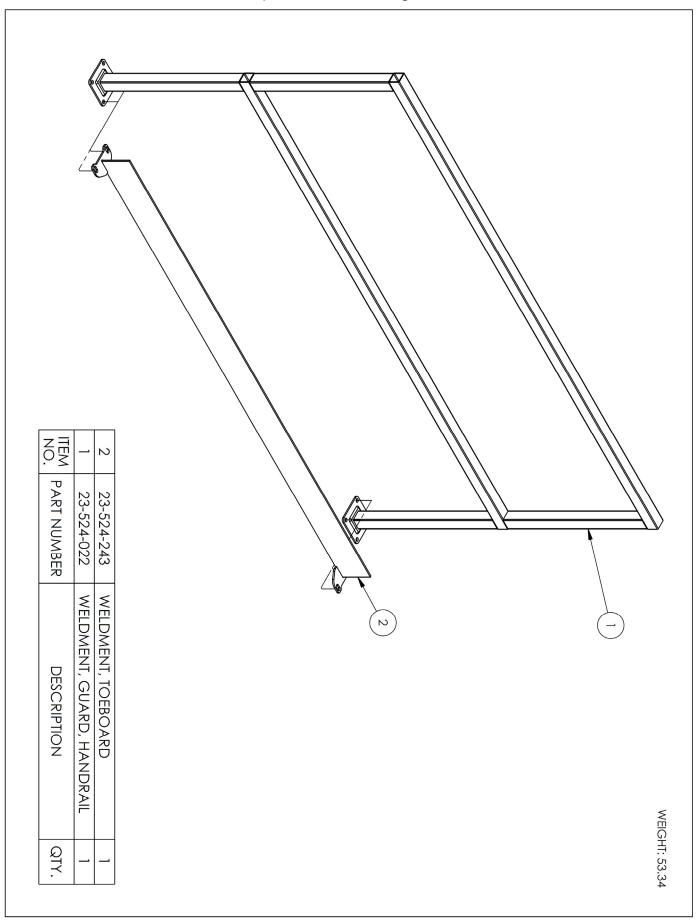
SQ-96-TB Exploded Parts Diagram and Bill of Materials
